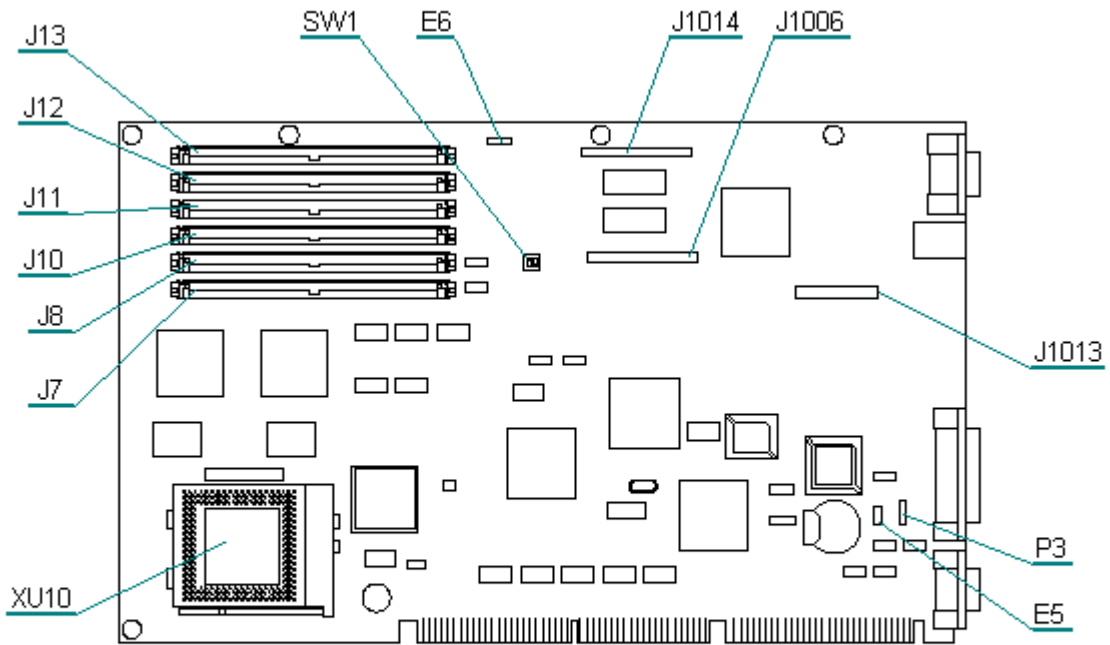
586-Based System Board Connector and Jumper Locations
